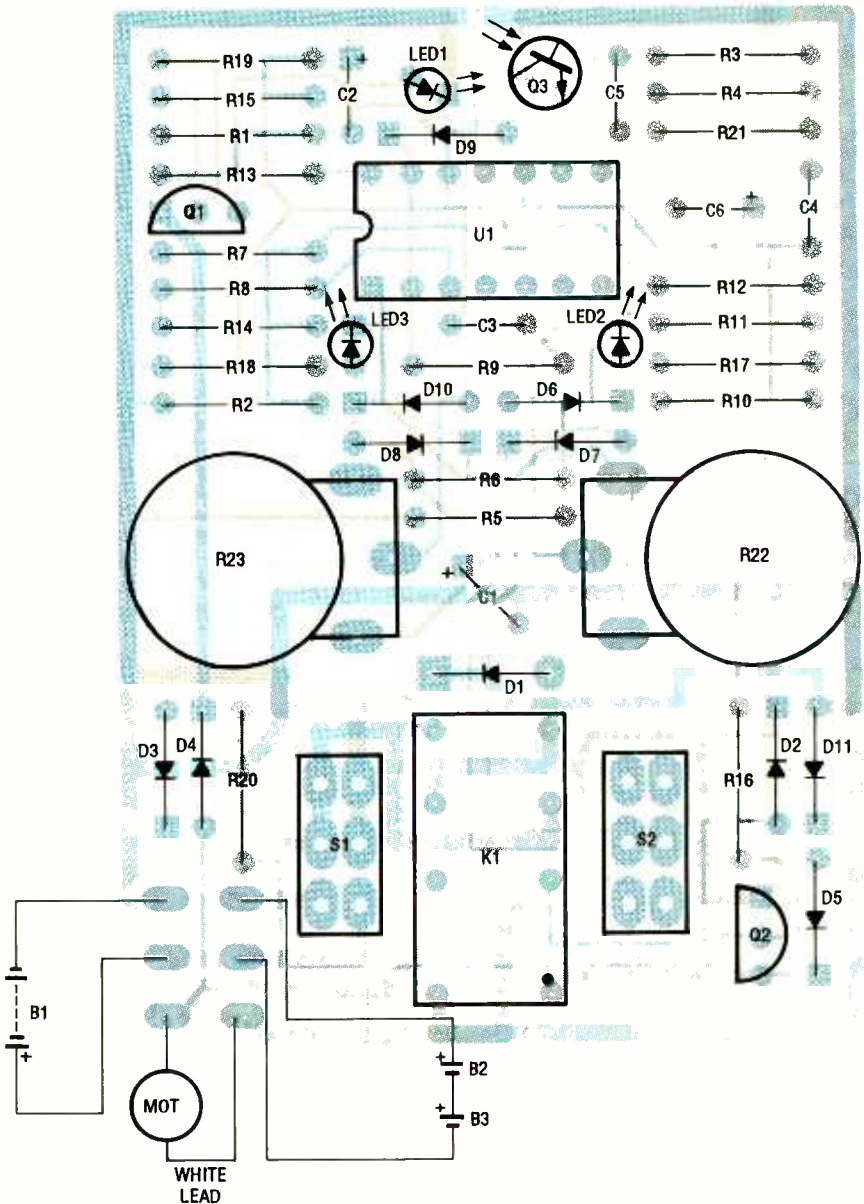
Stuffing the board should be easy with this parts-placement diagram. Note that the pads for LED1 and Q3 are tilted at 30°.
